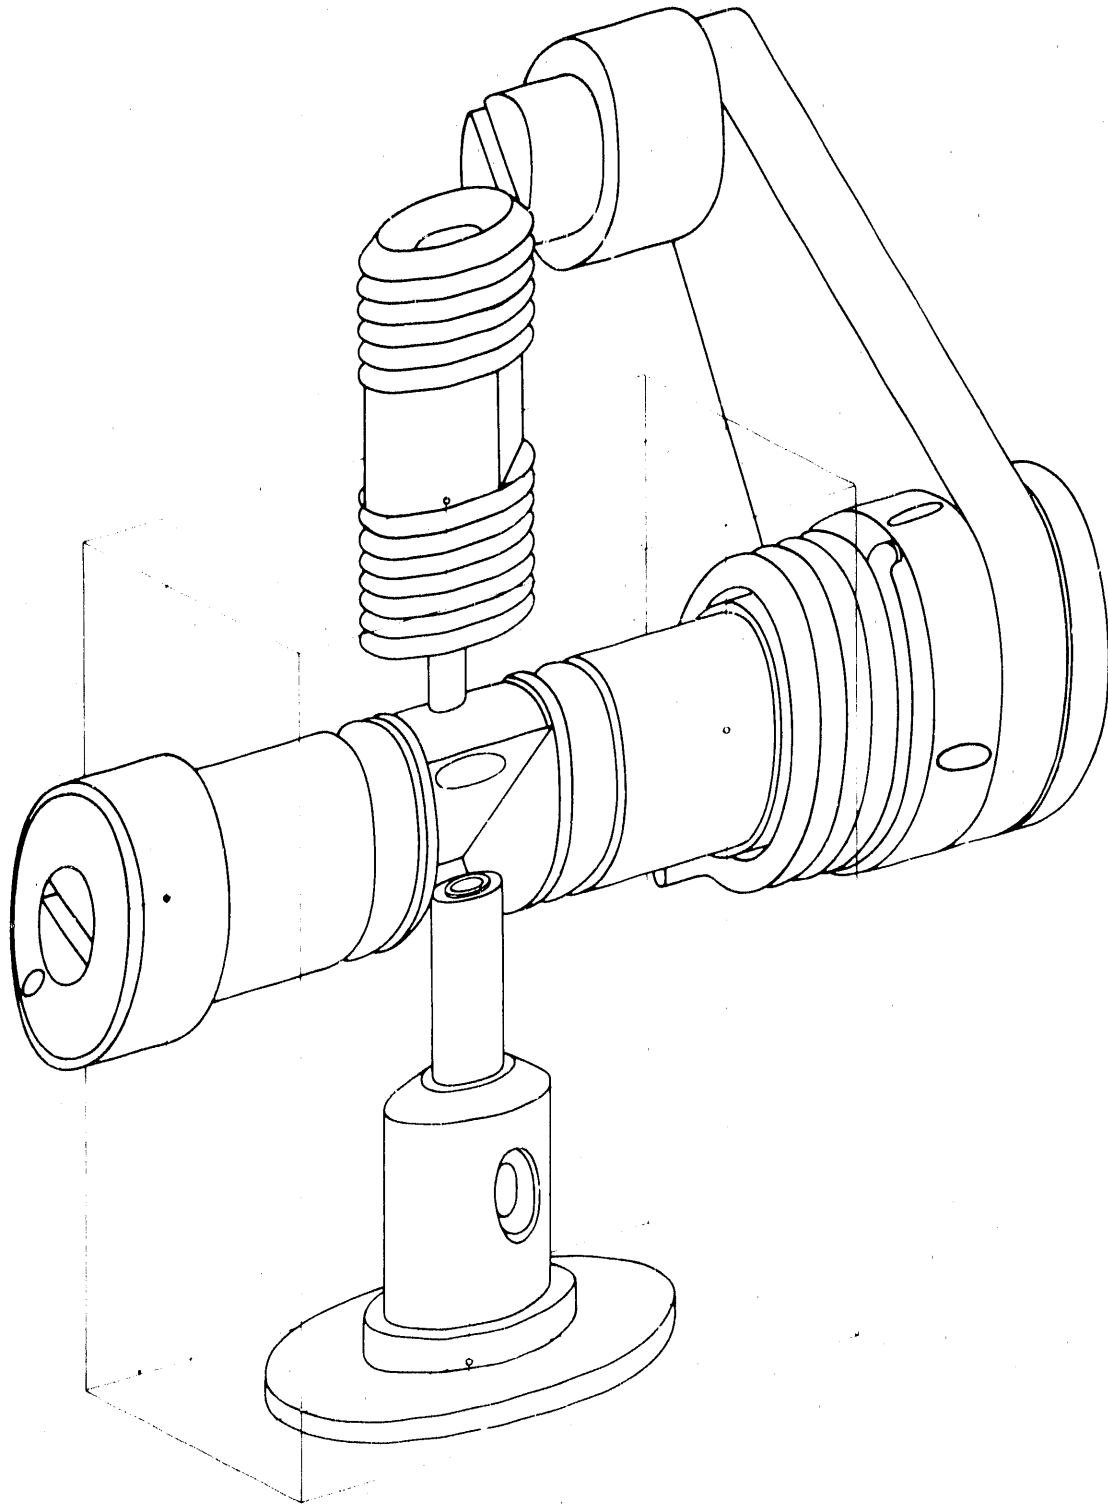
Three-Dimensional Drawing of Prototype 8
